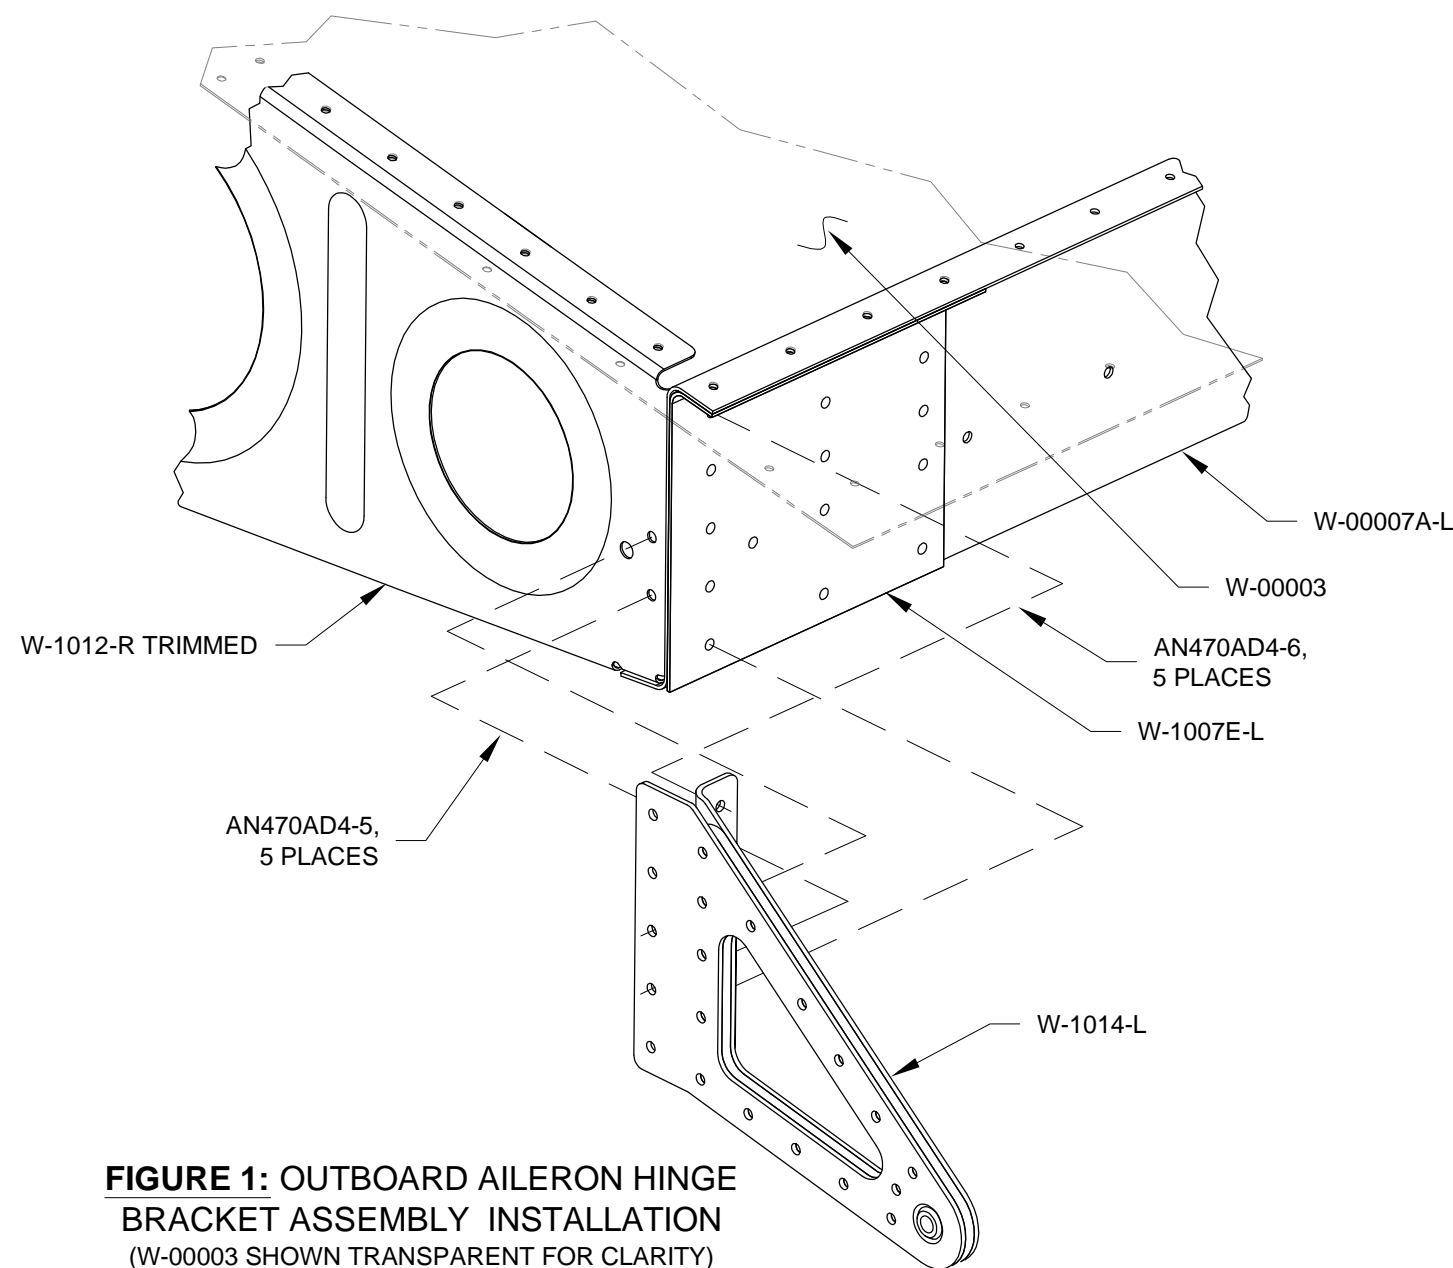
OUTBOARD AILERON HINGE BRACKET ASSEMBLY INSTALLATION
